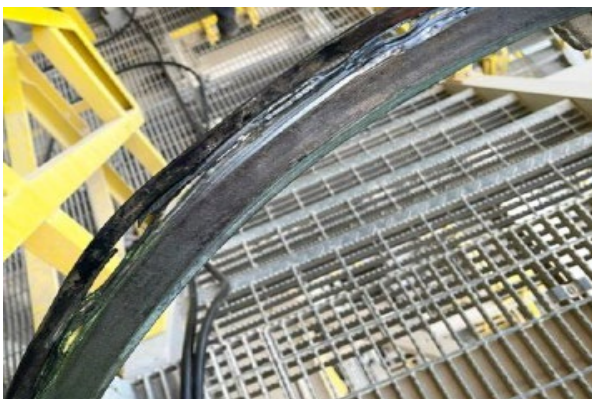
V-127-102 Inlet Gasket Failure (Winding Separation)
